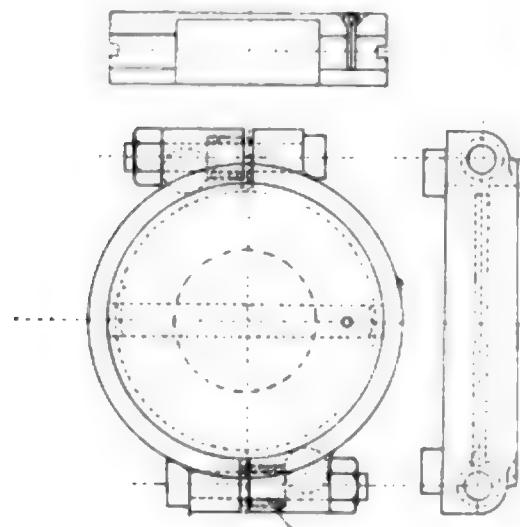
COMPENSATING GEAR LOCKING PLAN.
